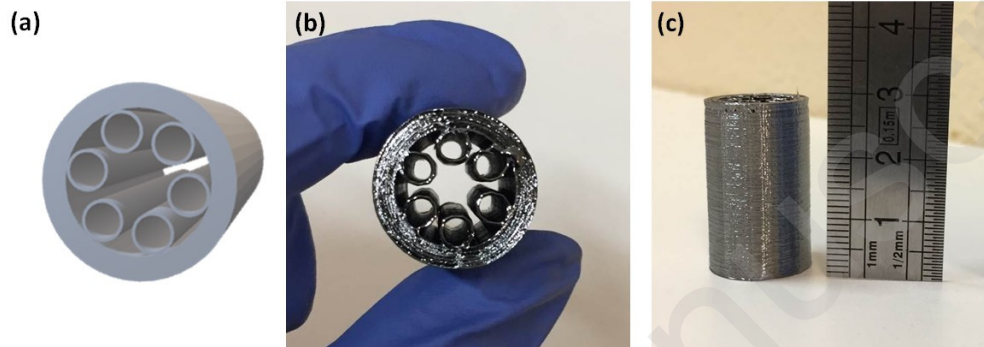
The printed preform: (a) computed view of the targeted design, loaded on the software of the customized 3D printer, (b) cross-section view of the chalcogenide printed preform, (c) side view of the printed preform with a centimeter scale
